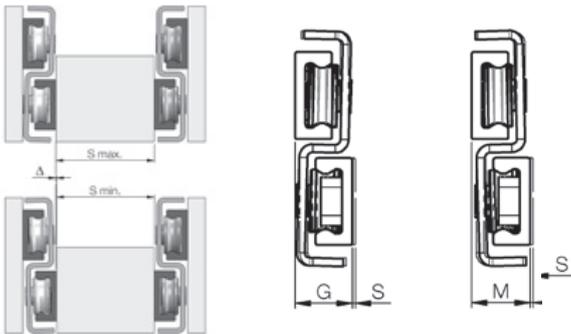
Telerace telescopic guides from Rollon can manage misalignment of the assembly surfaces thanks to axial floating rollers.
